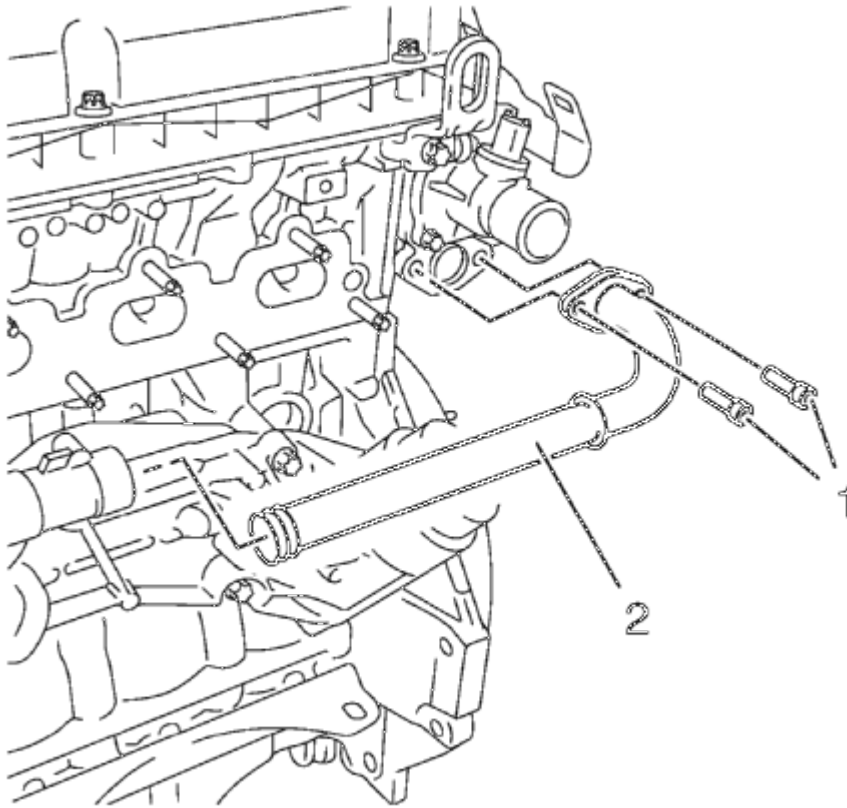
Identifying Engine Oil Cooler Outlet Pipe And Bolts
